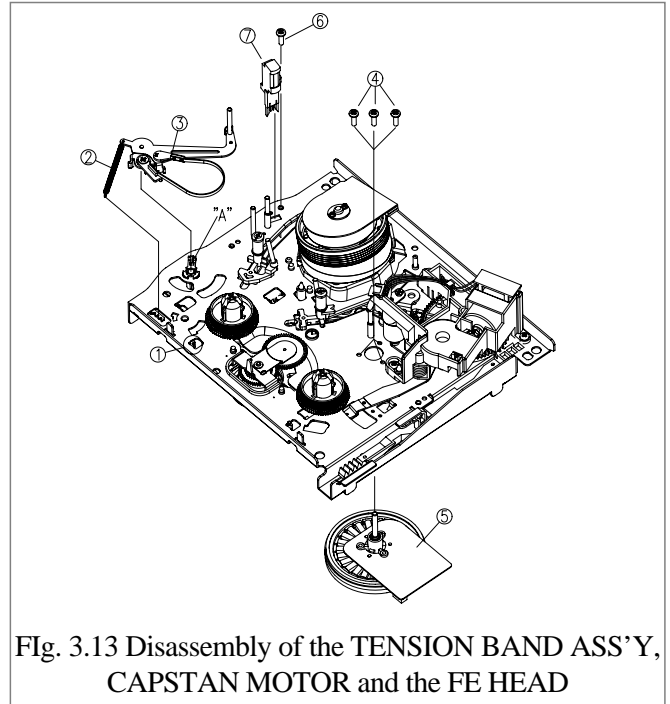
Disassembly of the TENSION BAND ASS'Y, CAPSTAN MOTOR and the FE HEAD
